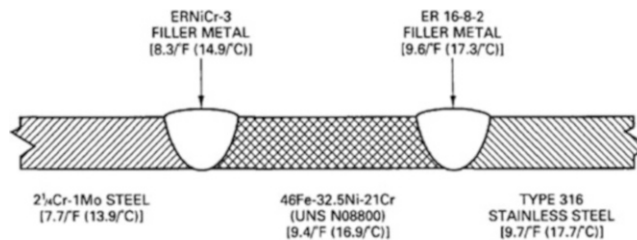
Buttering Welding Technique 2 to avoid liquation cracking. (Source: AWS clad and dissimilar metals, Chapter 6, 1998)
